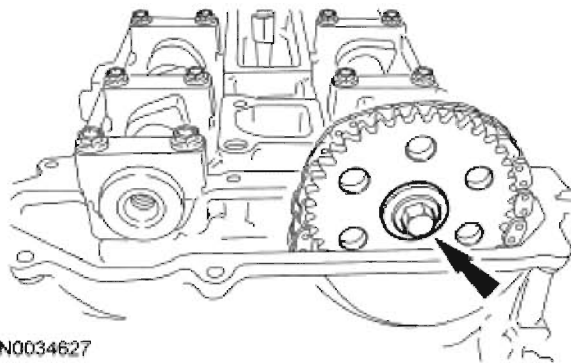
Identifying Bolts & Camshaft Bearing Caps
